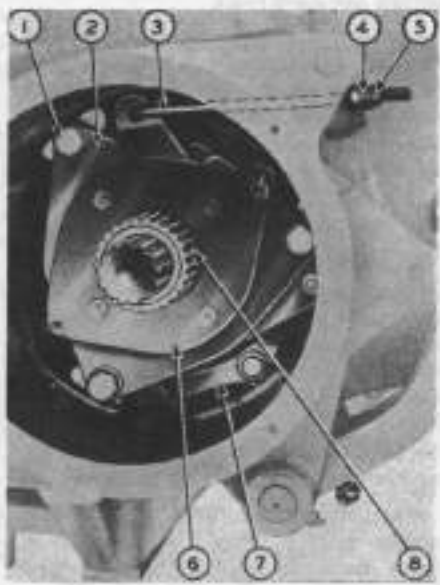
A—Series 44 power release view after clutch assembly is removed.
